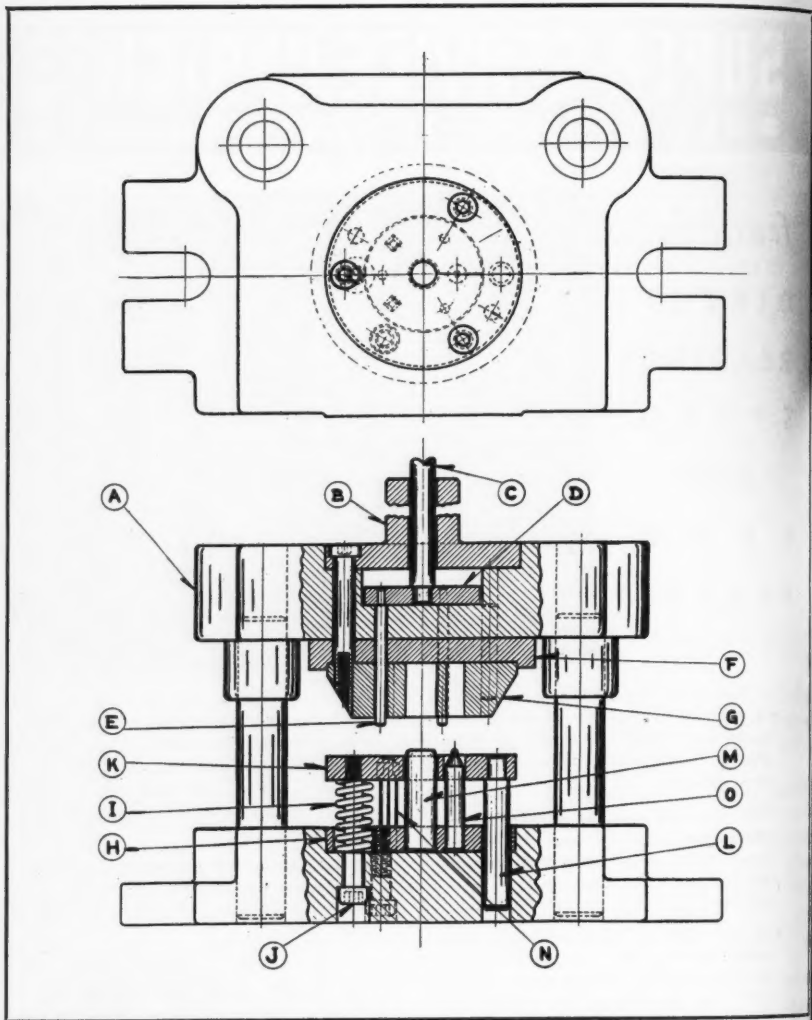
Drawing showing Design of Combination Lancing, Bending and Hubbing Die that Produces the Blank Illustrated in Fig. 1.
